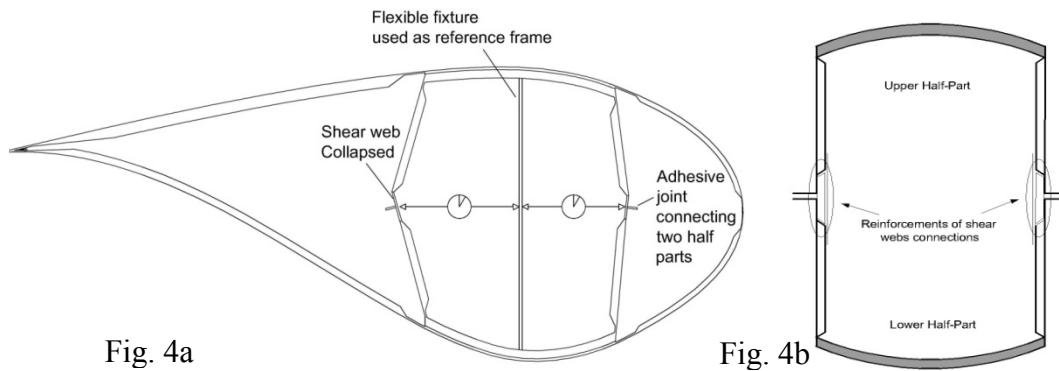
Cross sections of an unreinforced wind turbine blade and a reinforced box girder both from SSP-Technology A/S a) Web failure of SSP34m blade b) Reinforced shear webs in a new full-scale test of a SSP34m load carrying box girder
